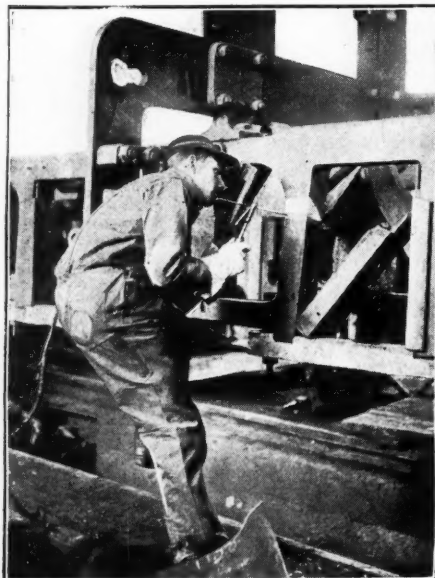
WELDING A LOCOMOTIVE FRAME
